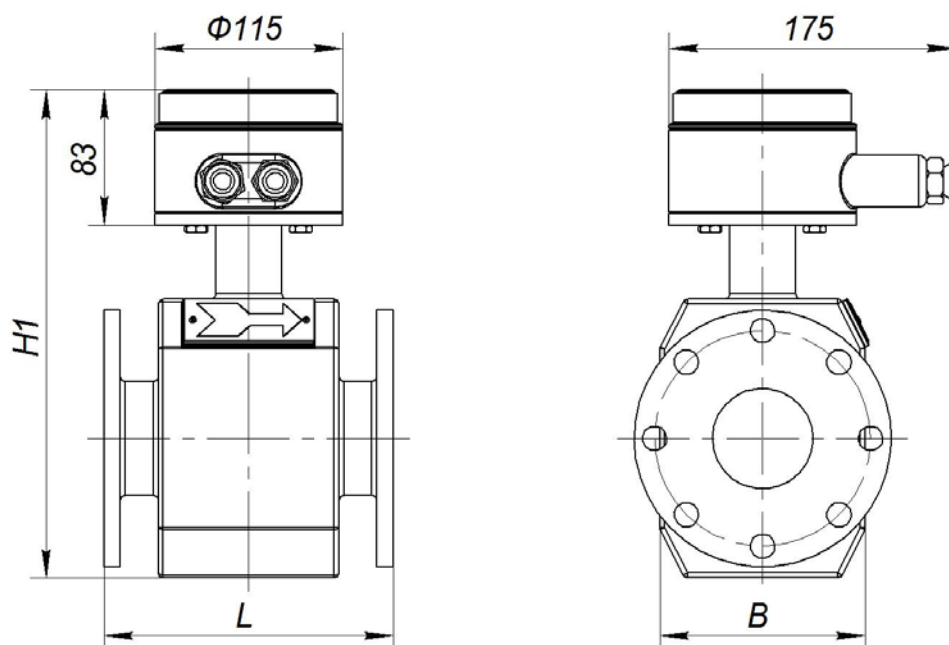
Dimensions and connection sizes of the remote type flowmeter (Dn 15-80mm)
